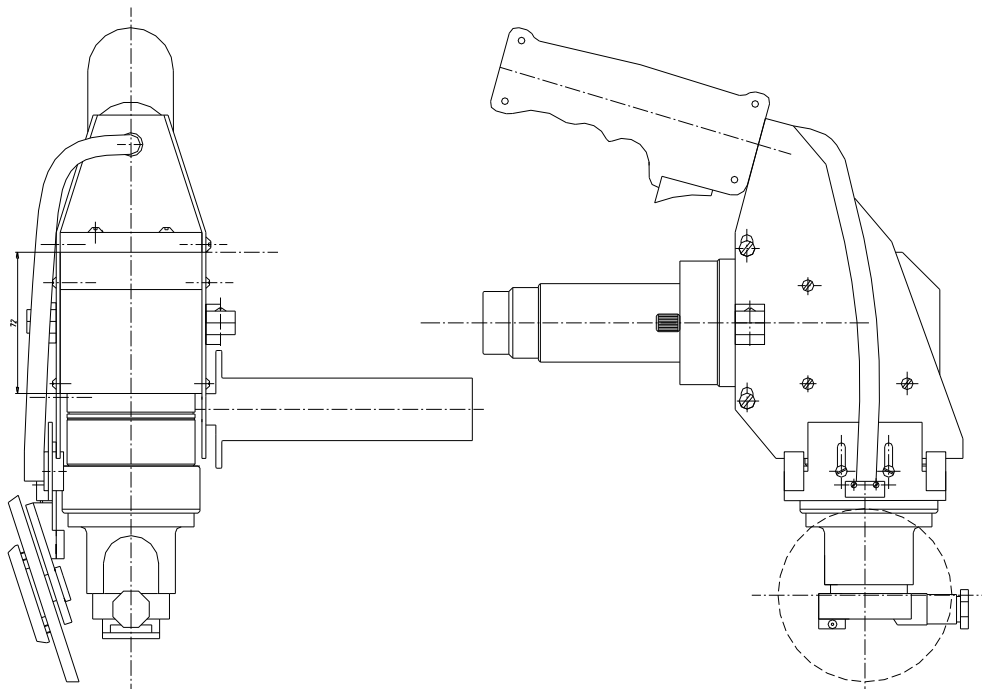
The chosen layout of the created mockup of a hand-held laser tool.
